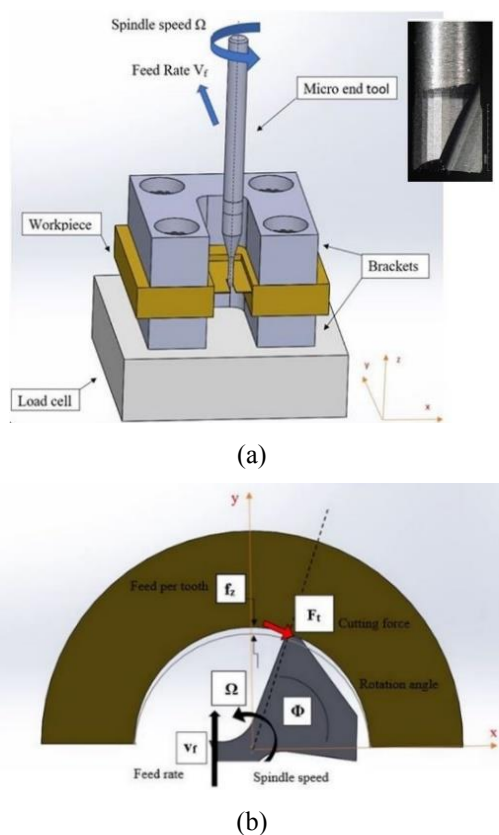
(a) Orthogonal milling process with thin wall cutting in 3D configuration, (b) 2D configuration with zero helix angle micro end mill.
